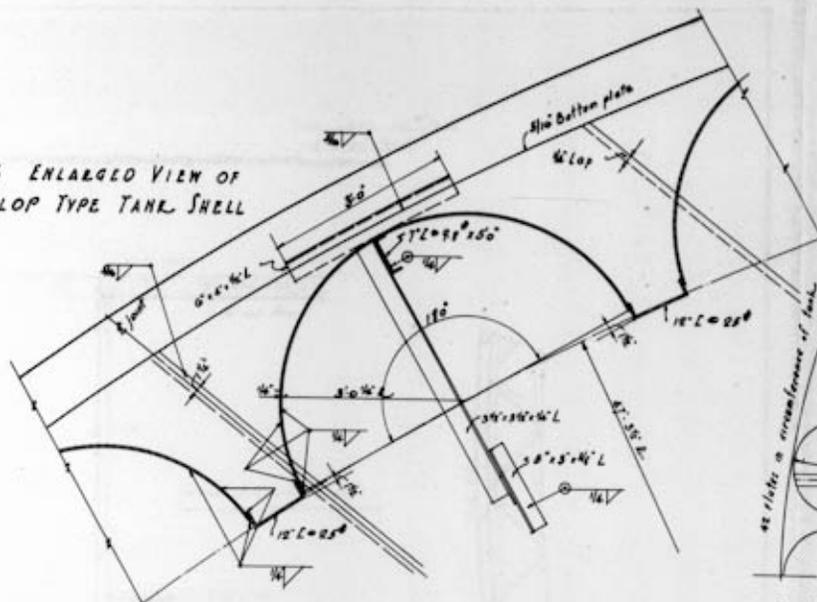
PLAN OF SCALLOP TYPE TANK SHELL
